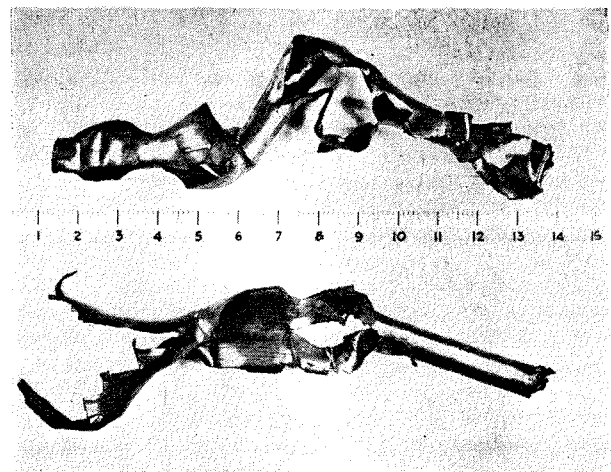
A close-up of an individual tube shows a fracture characteristic of acetylene explosions.
